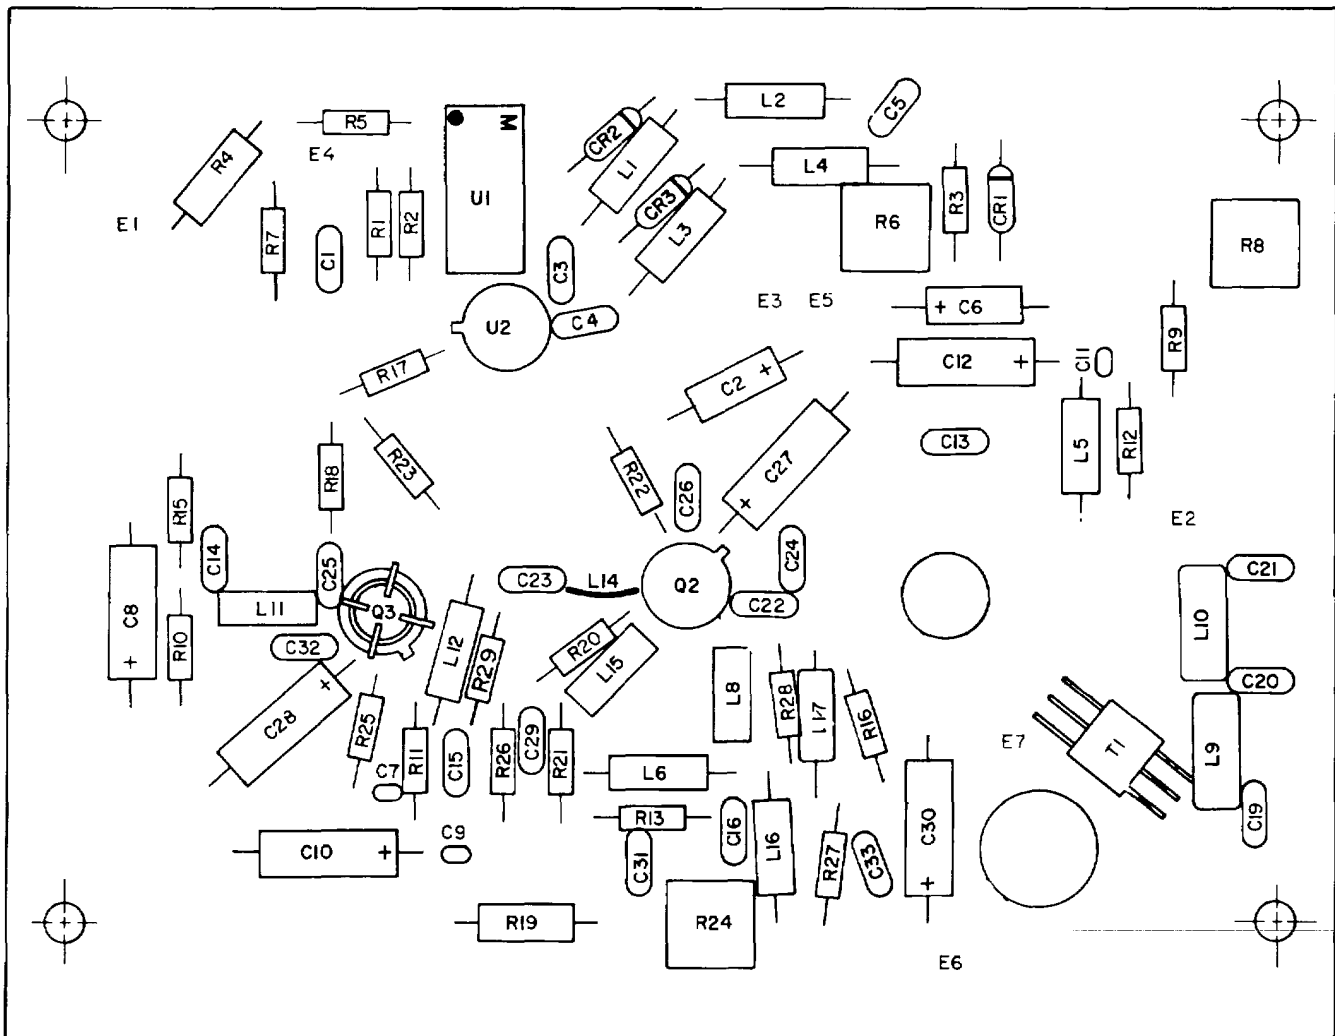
Modulation Eliminator Circuit Card Assembly, 1A5A5A1 Parts Location Diagram
